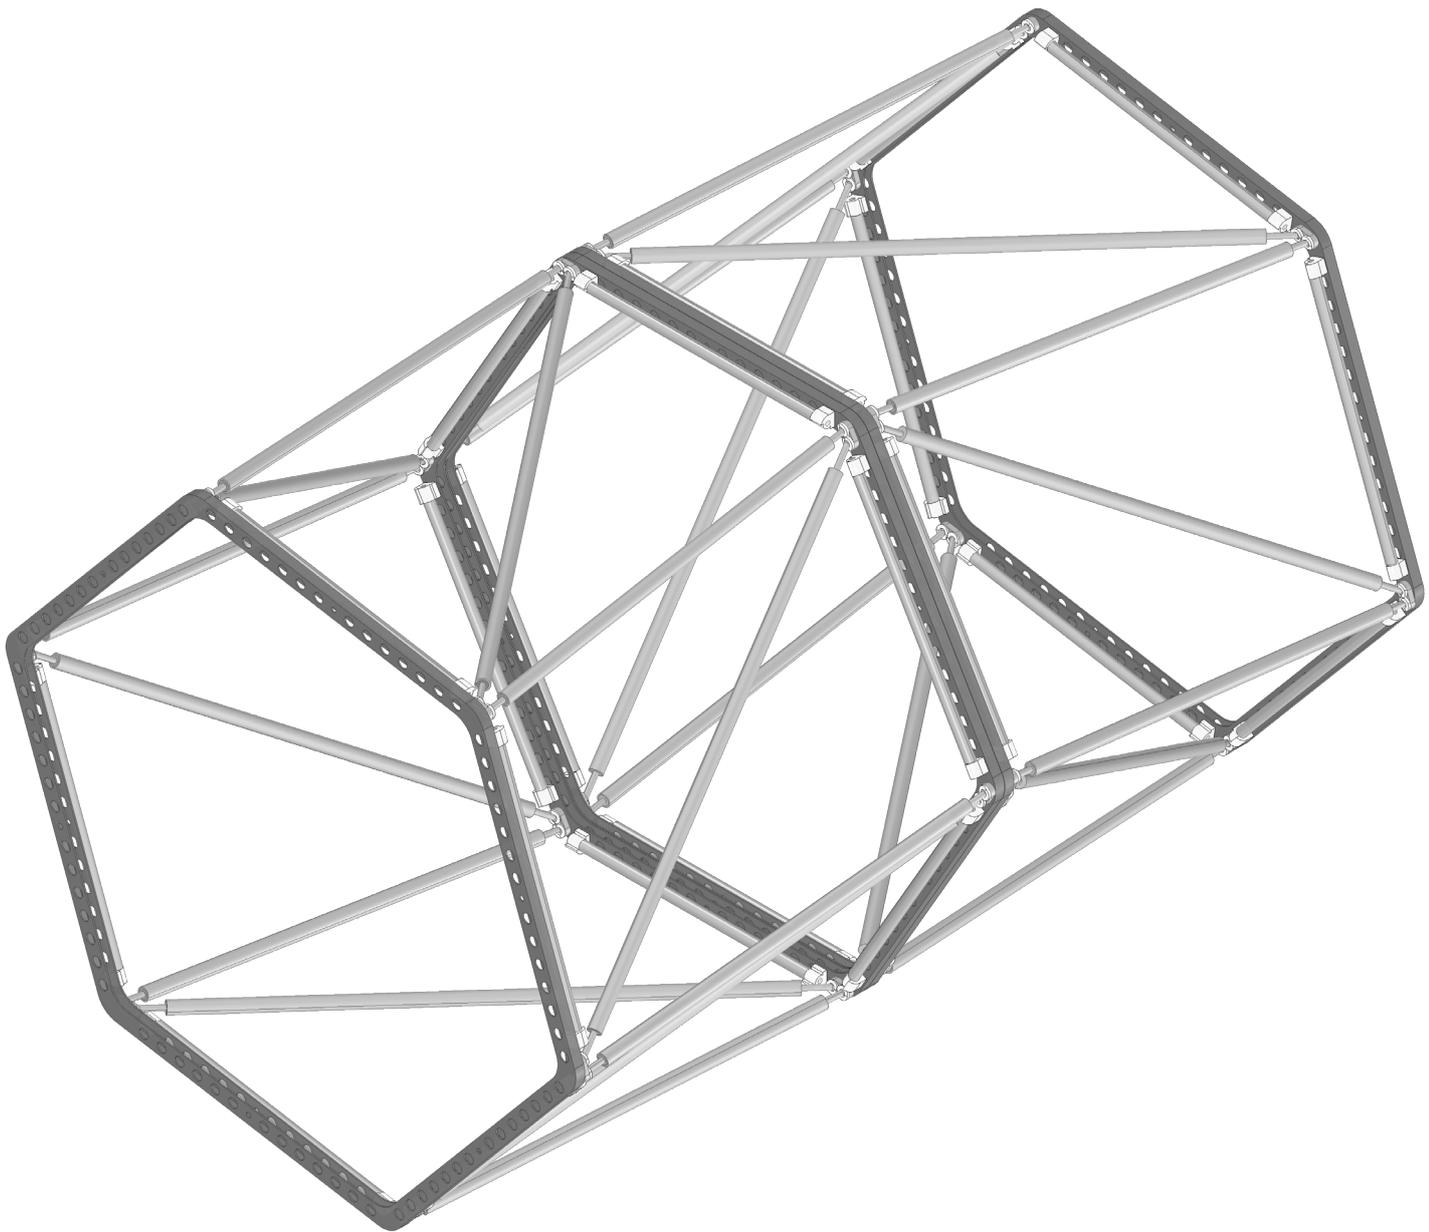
Connecting structure units with bolt and nut fixing
